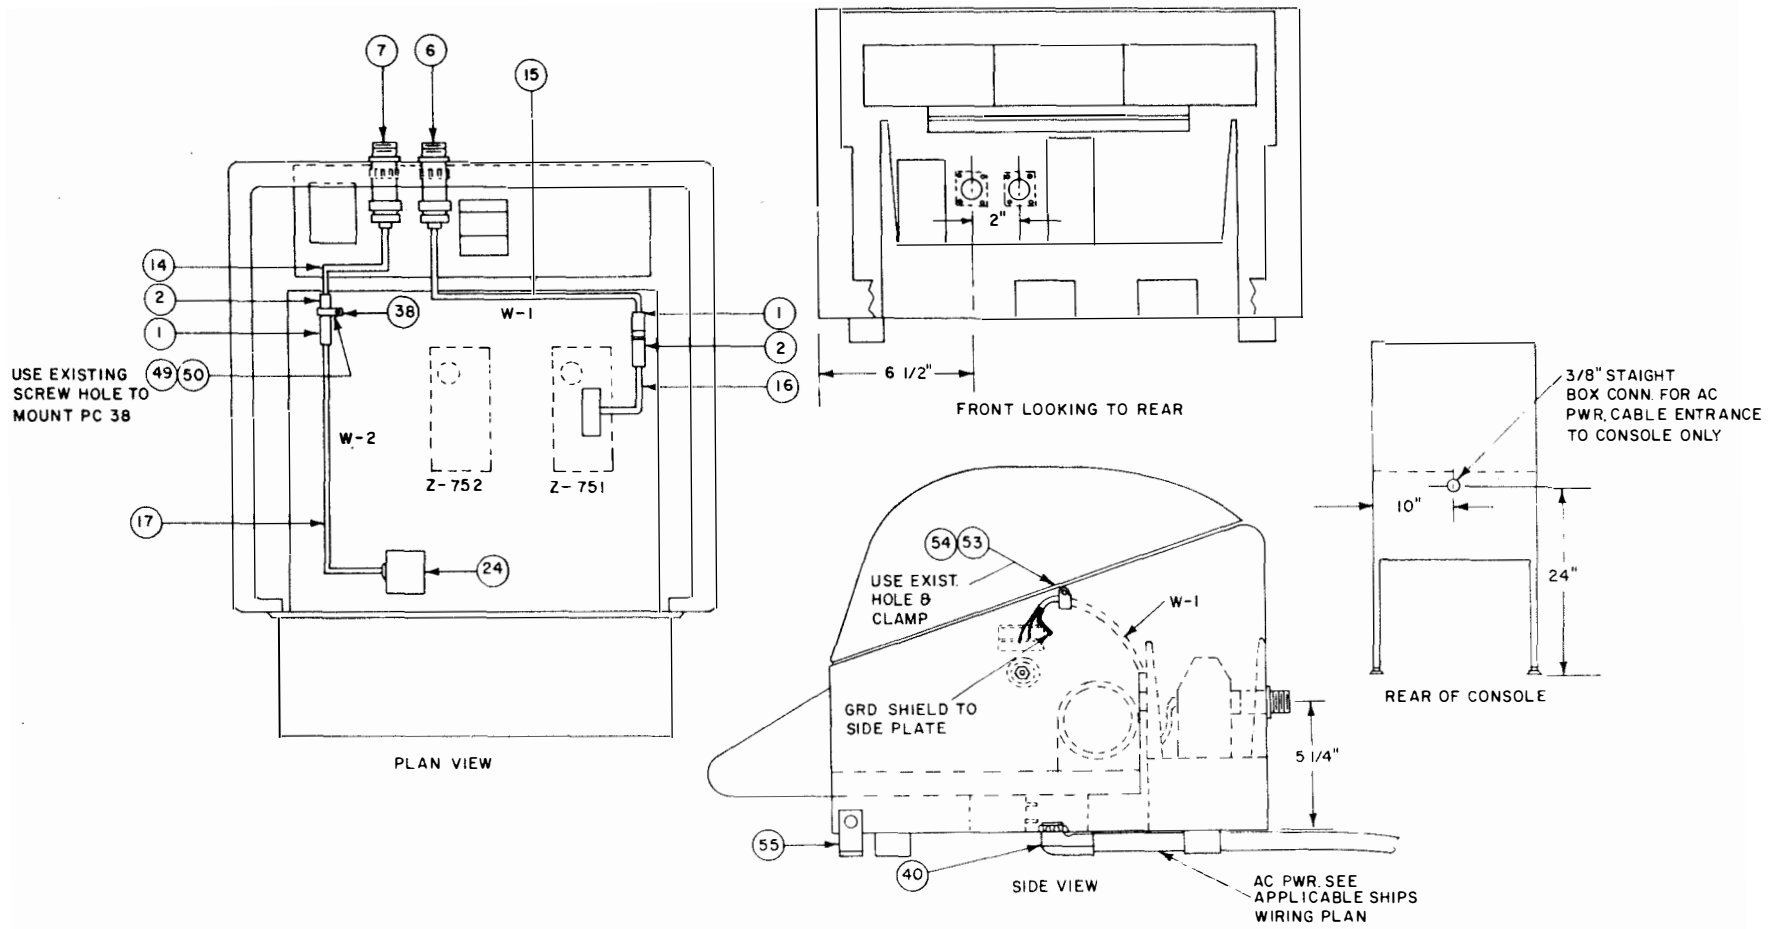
TT-47/UG Installation Drawing (Part 2)
